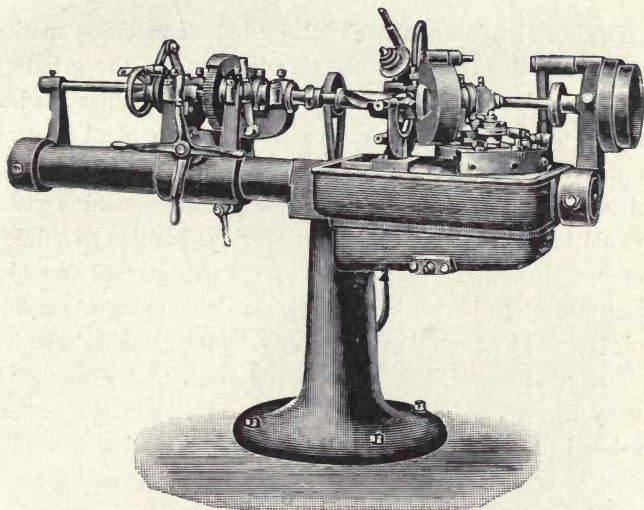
The "Cui" Automatic Machine for Grinding Twist Drills.
